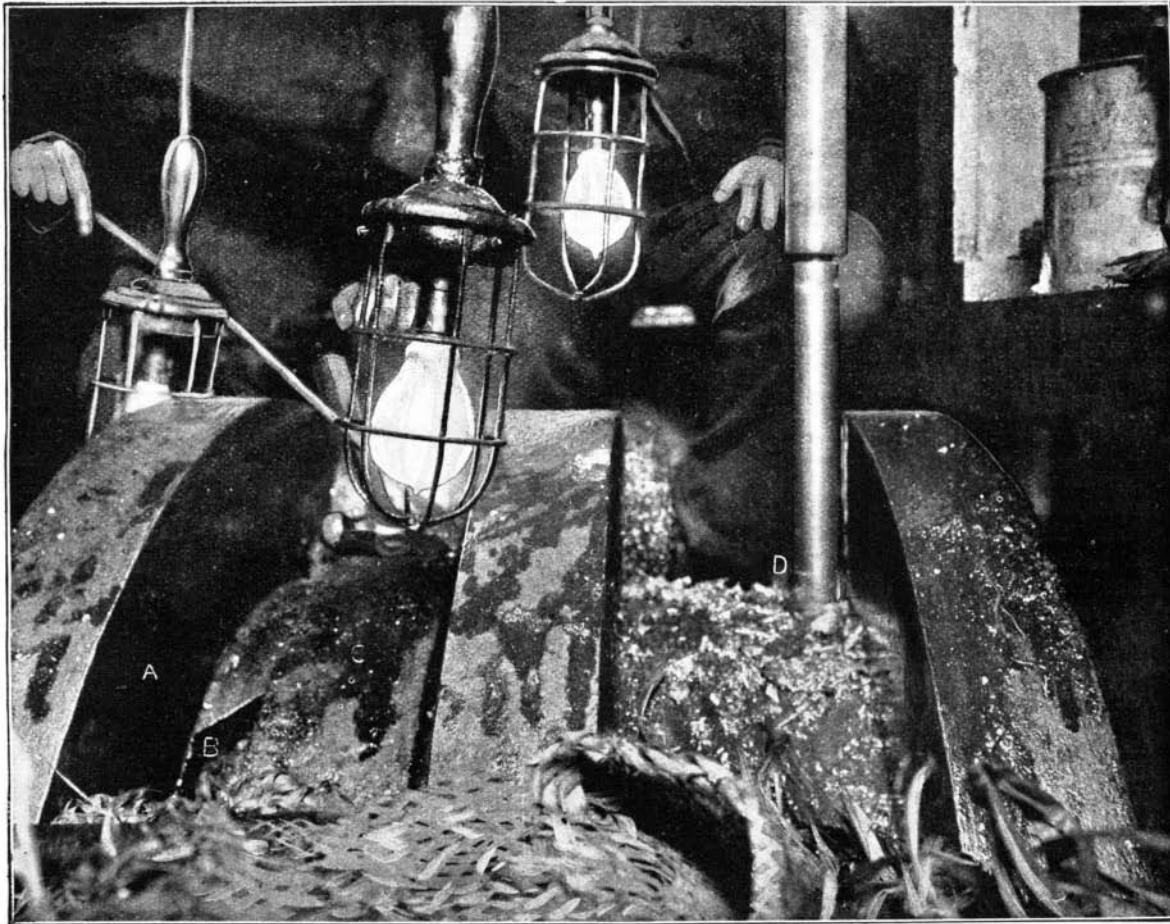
STEAMER UMBRIA—VIEW SHOWING THE BROKEN SHAFT AND THE DRILLS WORKING THEREON.
